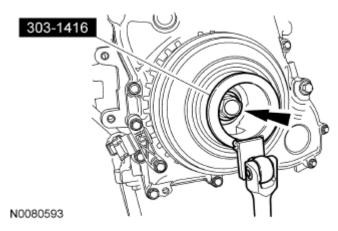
Holding Crankshaft Pulley Bolt Using Crankshaft Damper Holding Tool Courtesy of FORD MOTOR CO.
